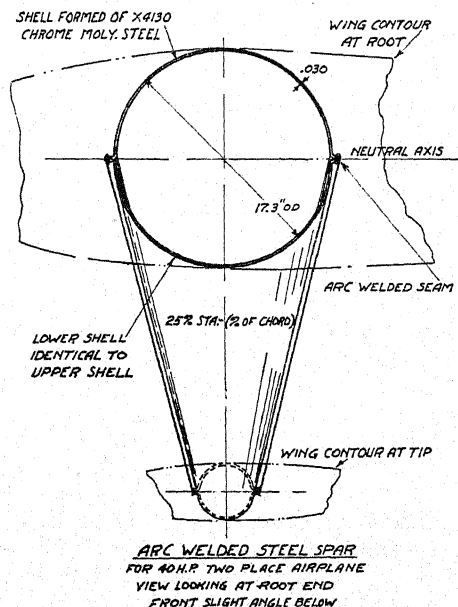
Design of tubular wing spar for arc welding.
